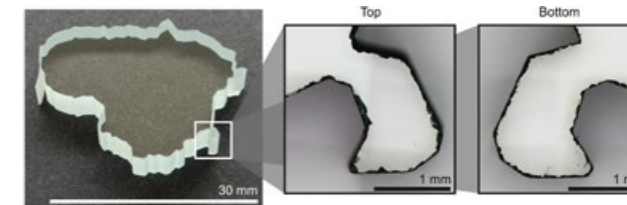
Complex samples, cut with a bottom-up technique using a burst regime. Lithuanian borders, cut from 4.8 mm-thick glass with top and bottom surfaces inspected with an optical microscope.
